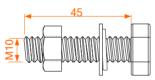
Dimensions of fastener for metal frame (figures in mm)
